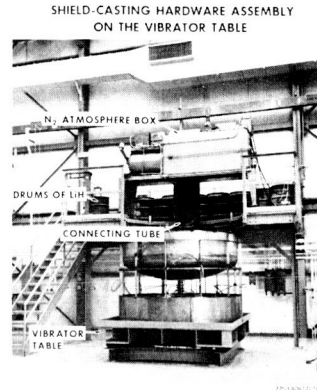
Shield-Casting Hardware Assembly on Vibrator Table
